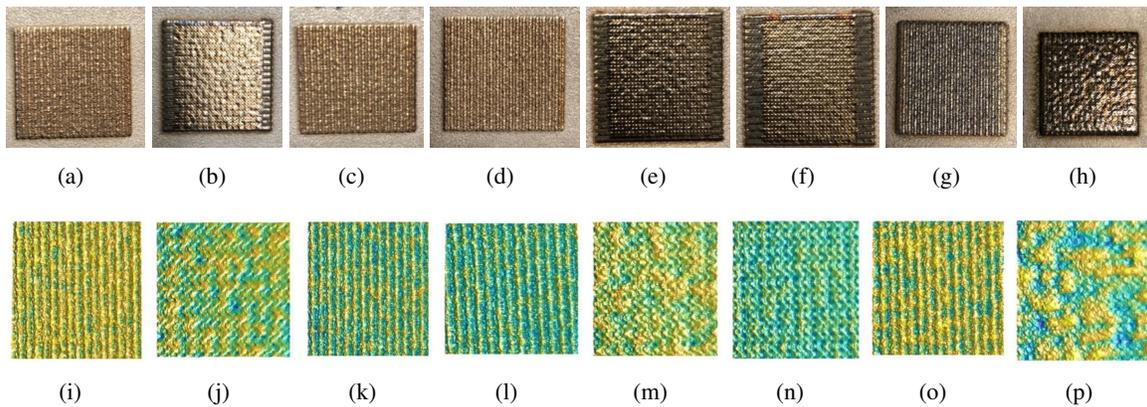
Examples of additive manufactured surfaces with different surface topographies. (a) - (h) Photographs of the manufactured surfaces; (i) - (p) corresponding reconstructed surface topographies.
